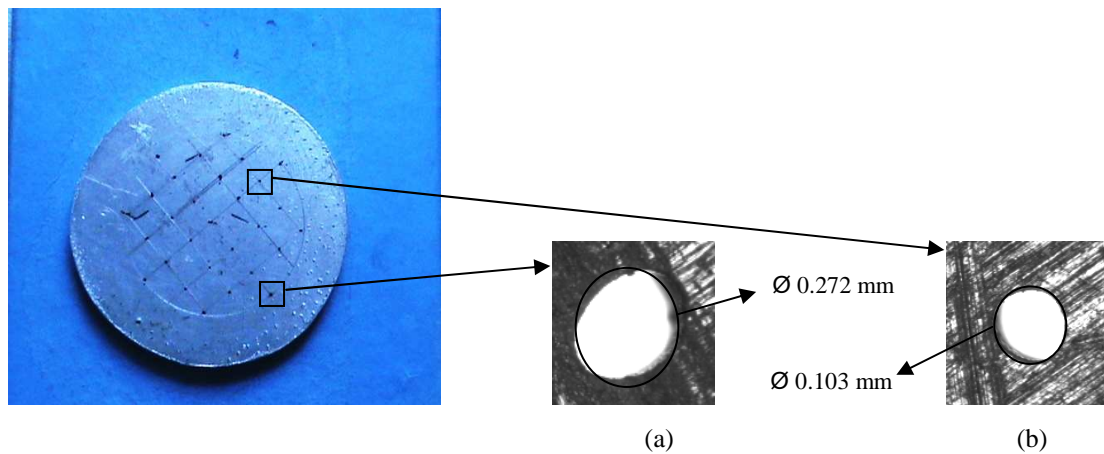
Perforated aluminum plat 3 mm thickness, 50 mm diameter machining by EDM die sinker (a). 0.272 mm; (b). 0.103 mm
